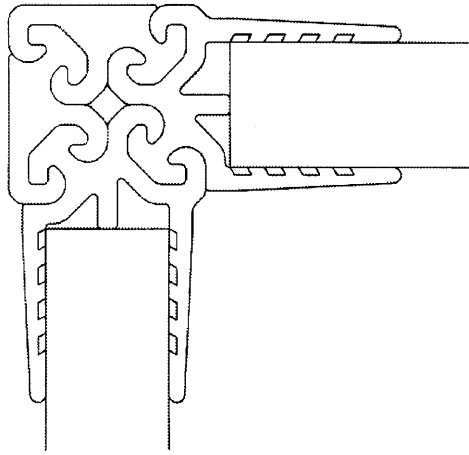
Drawing of the anticipated corner joint using Clippeez™ end clip extrusions.
